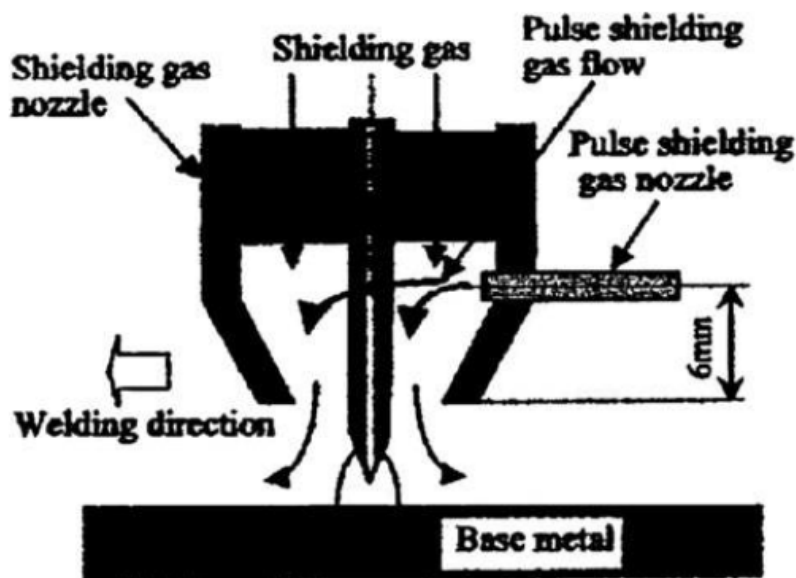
e : Welding torch for PSG method (Ju, Suga and Ogawa May 2002)
